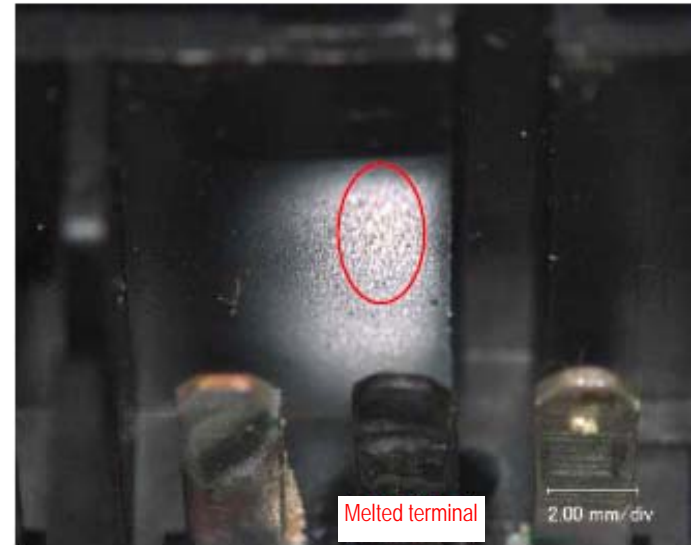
White framed area in the left photo enlarged (connector inner wall area)
